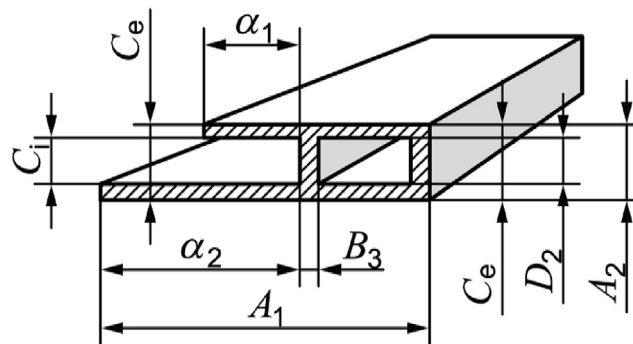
Cross-sectional dimensions with rib root measurement points.
